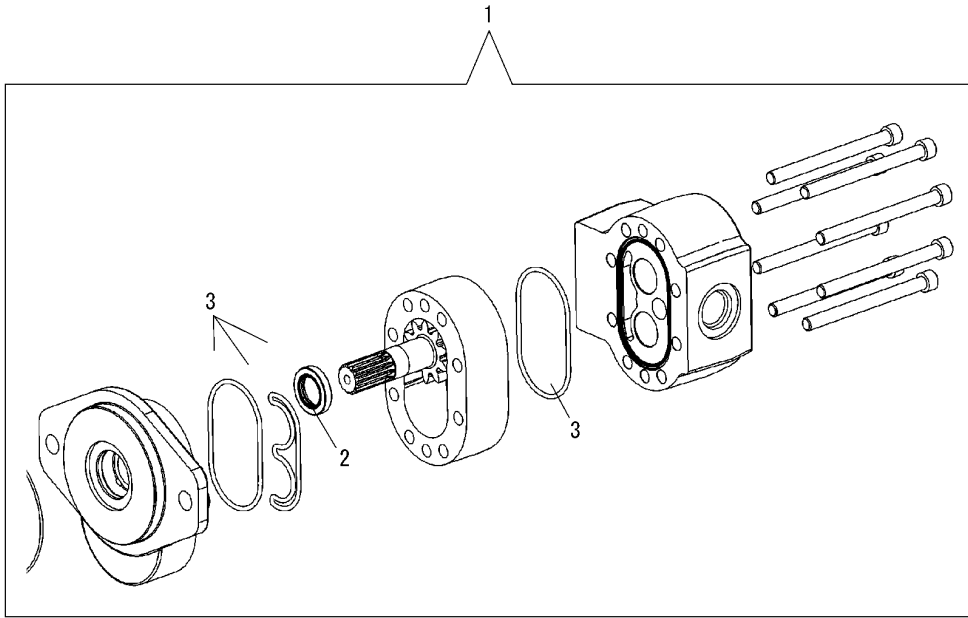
GEAR PUMP - DOUBLE(HIGH-FLOW AUXILIARY)
